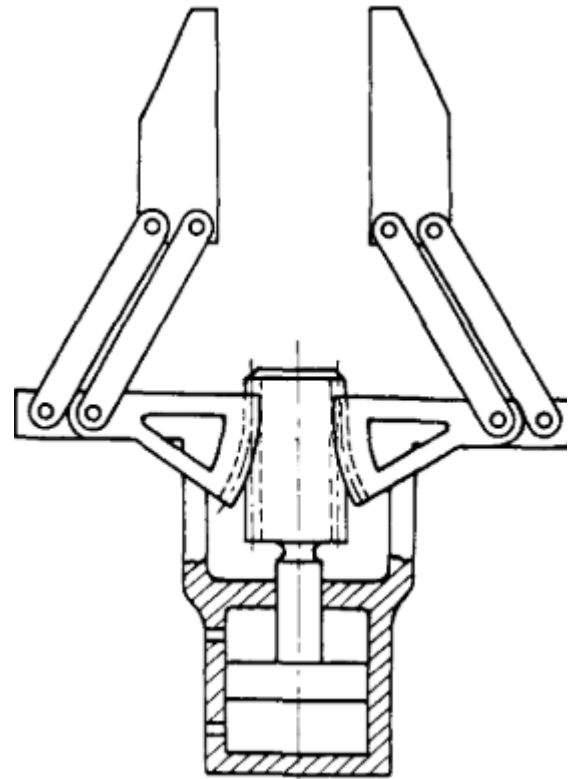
Rigid jointed gripper with element linkage similar to the proposed gripper design[24]
